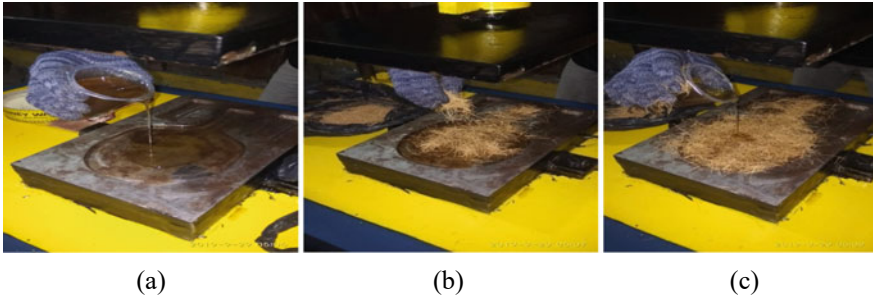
Pouring resin and coconut fiber into a mold on a press machine
